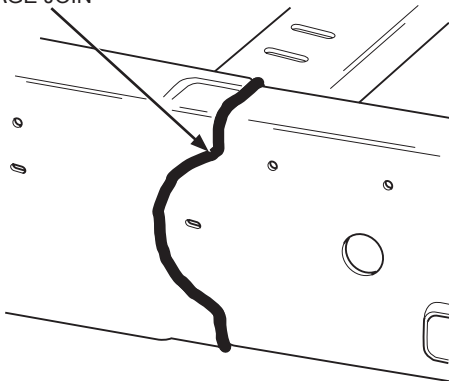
FRONT RAIL TO CENTER SIDE RAIL MARRIAGE JOINT WELD OUTBOARD (LH SHOWN, RH IS SYMMETRICALLY OPPOSITE)
